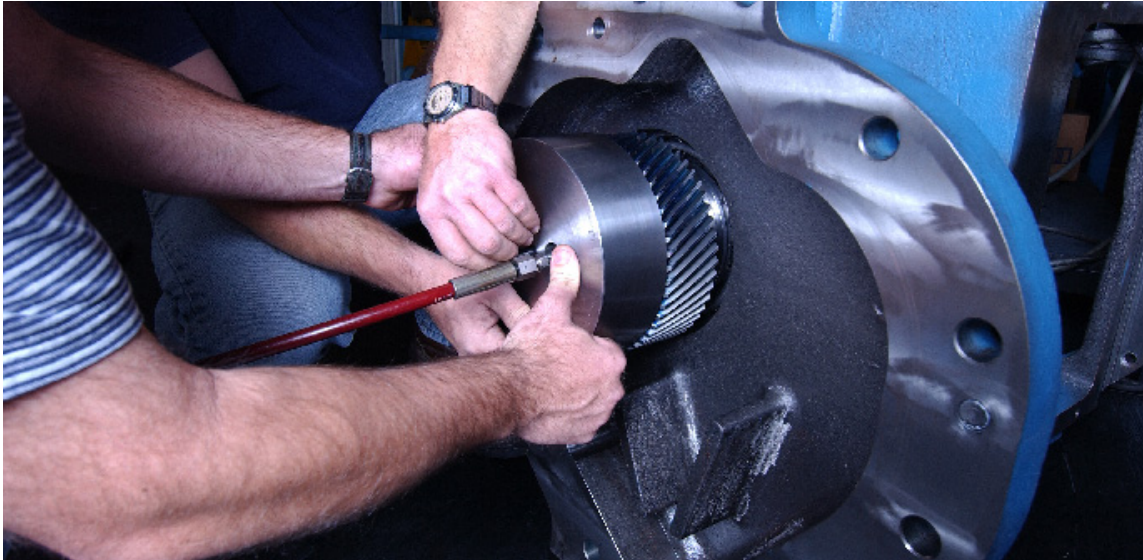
INSTALLING GEAR STOP/RETAINER
